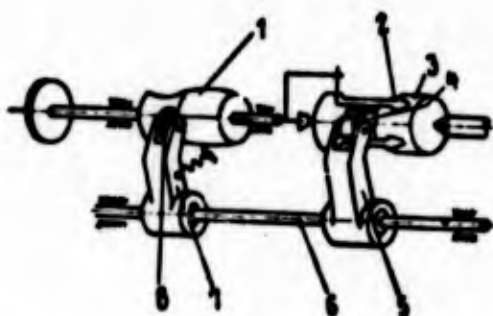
Profiling master form of machine of type KhSh. 1) master form; 2) standard blade; 3) mounting; 4) thrust blade; 5) lever; 6) shaft; 7) lever; 8) abrasive wheel for grinding master form.
